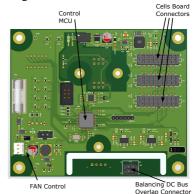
Printed circuit board of battery unit front panel (TOP side)
